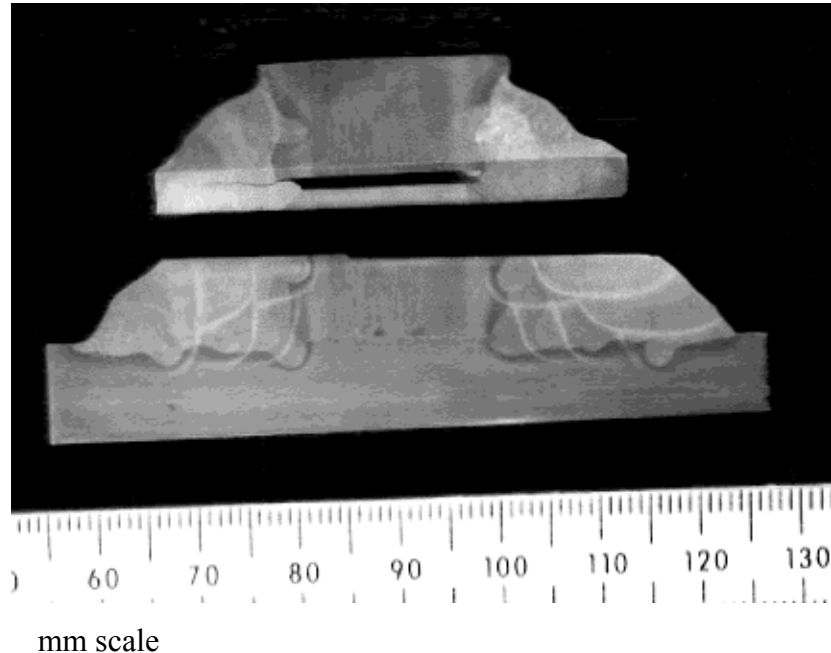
Example of weld metal cracking observed from a transverse notch in cruciform weld W351.
